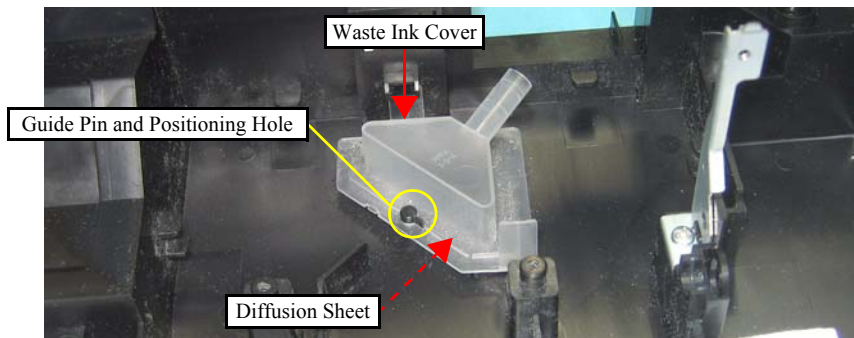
Removing the Waste Ink Cover and Diffusion Sheet
